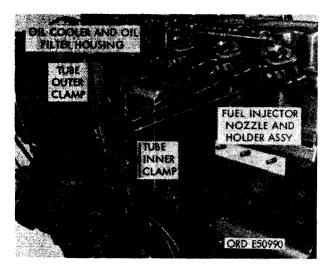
REMOVING OR INSTALLING CYLINDER NO. 4, 5, AND 6 FUEL INJECTION TUBES.
